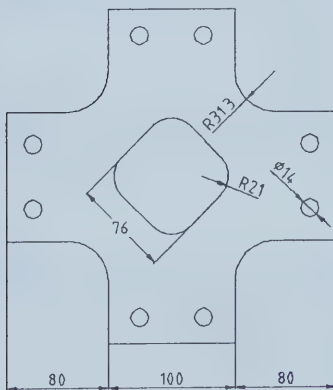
Front view of the design drawing of the biaxial test rig
